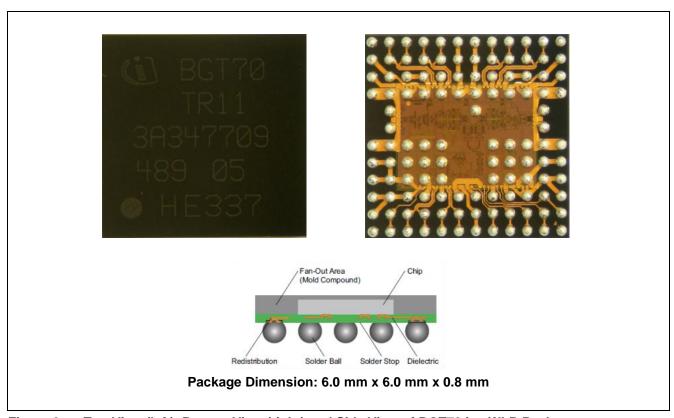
Top View (left), Bottom View (right) and Side View of BGT70 in eWLB Package
